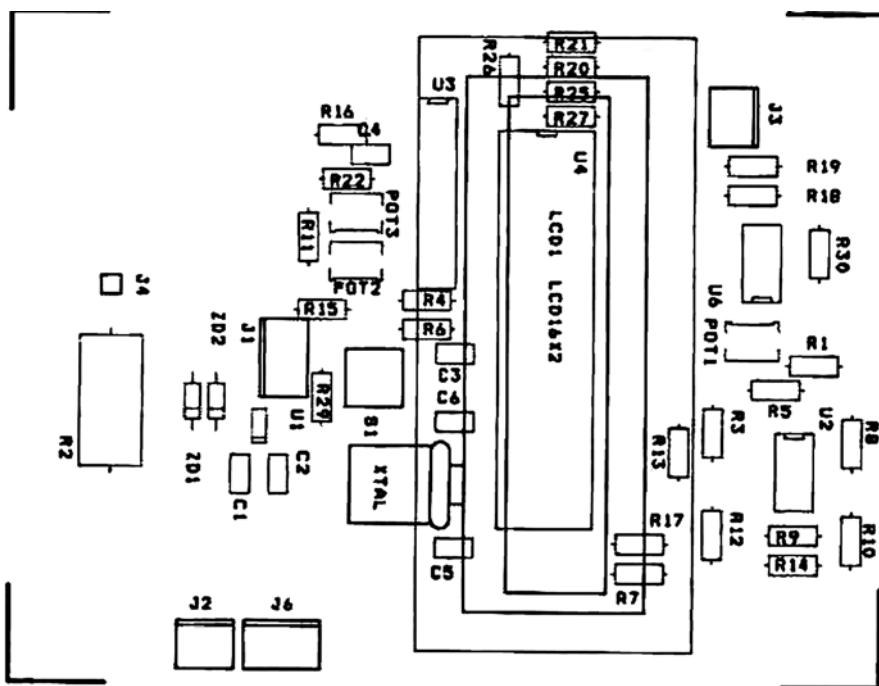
PCB (bottom) layout of sensor unit of CH₄-monitoring device
